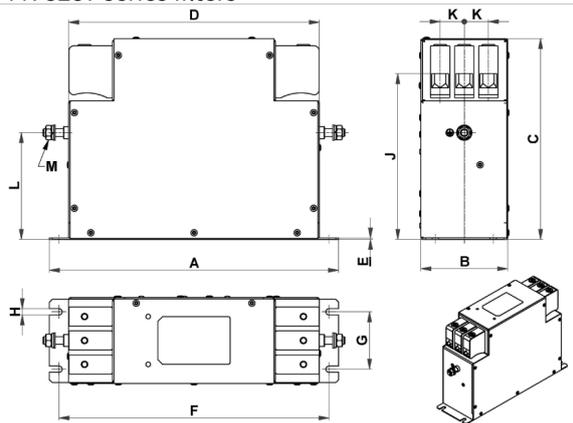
Dimension drawing of FN 3287 series filters (unit: mm)
